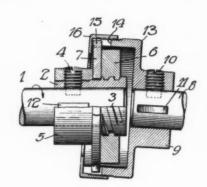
Sectional elevation of coupling showing the two shafts in axial alignment
